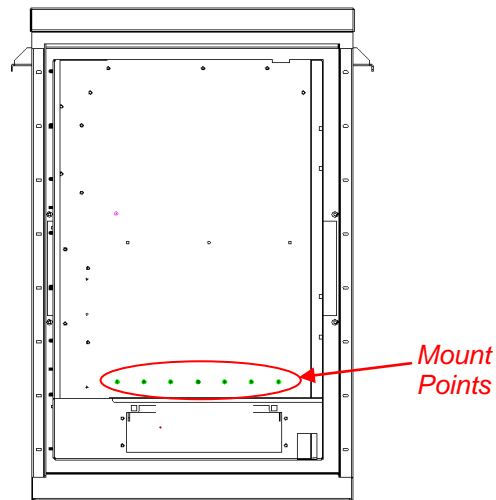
Typical rack elevation view of LCC/LCP before internal equipment added.
